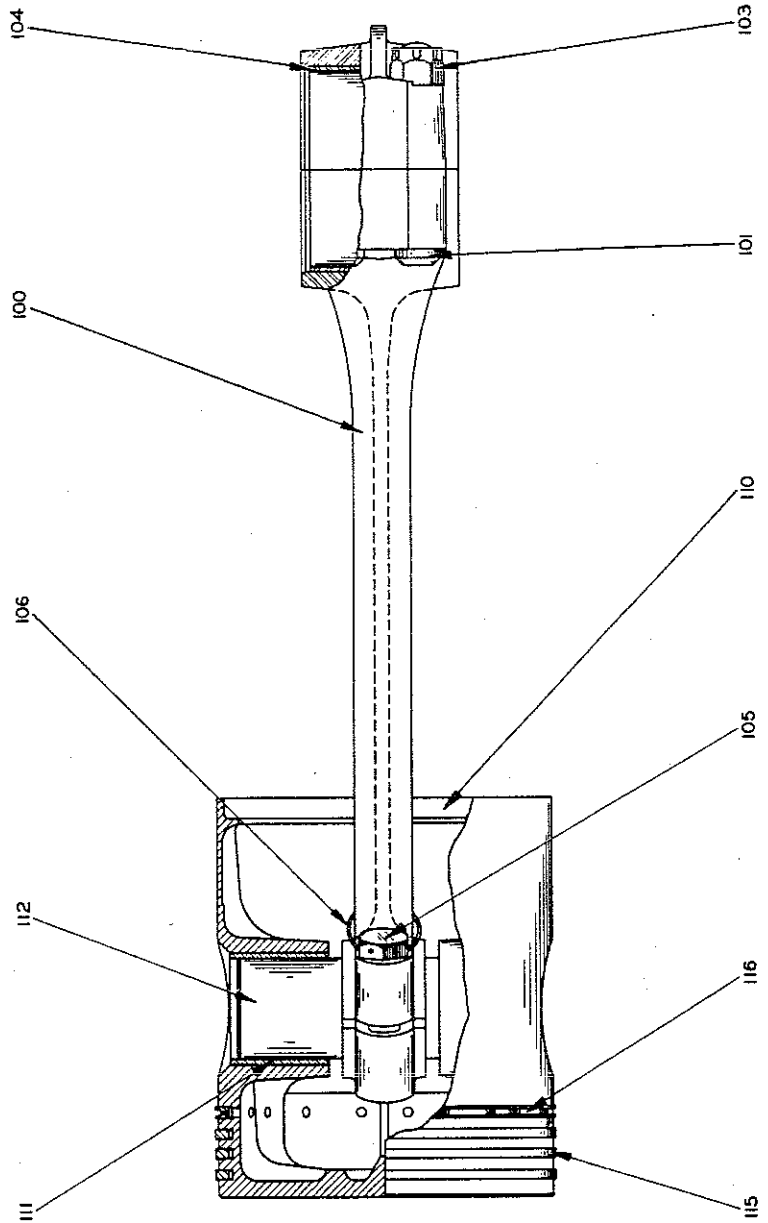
Cross Section through Connecting Rod and Piston Assembly
